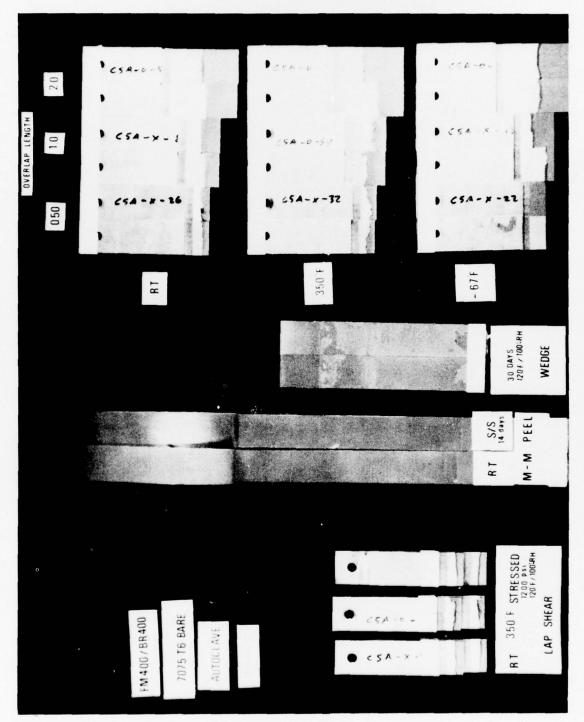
Specimen Failure Surfaces – FM 400, PasaJell 105, Autoclave Bonds
